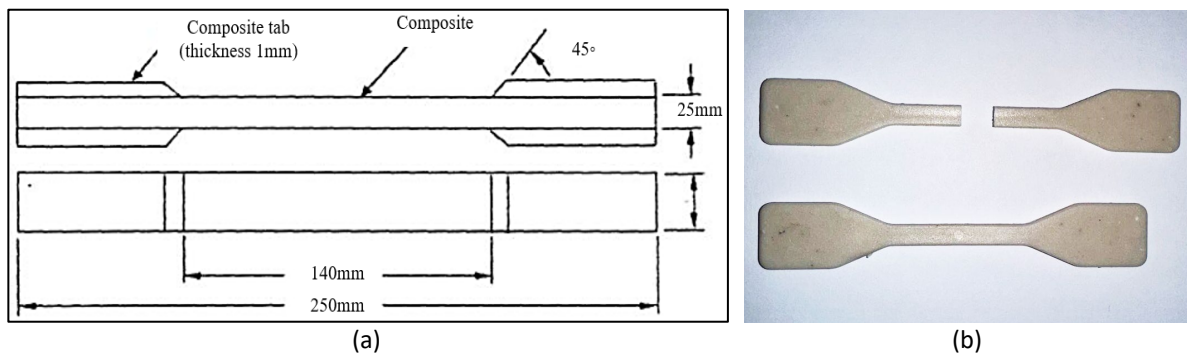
Tensile test sample as per ASTM D3039 standards (a) Sample dimensions (b) Tensile sample
